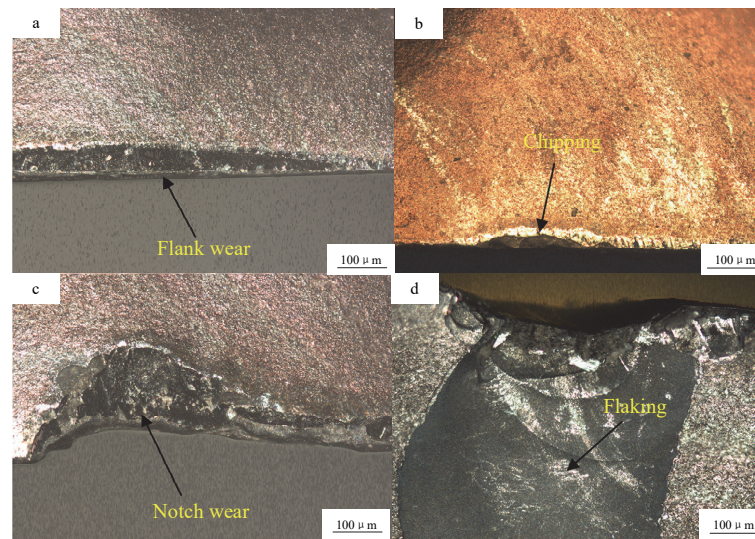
Several wear problems occurred in the milling of Inconel 718 with carbide ball nose cutters: (a) flank wear; (b) chipping; (c) notch wear; (d) flaking [30].
